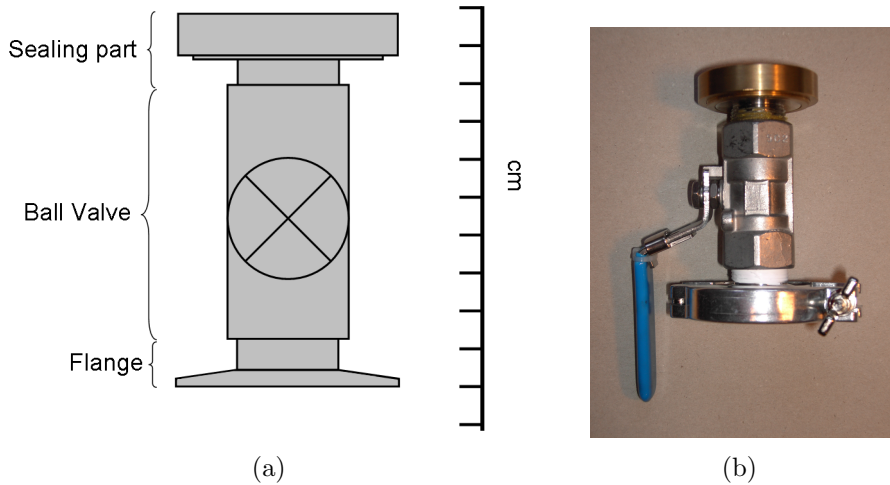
a) Principal sketch of the sealing mechanism: A ball valve with a Q40 flange and sealing part threaded into it. The sealing part is described in figure 3.4. b) Photograph of the sealing mechanism.
